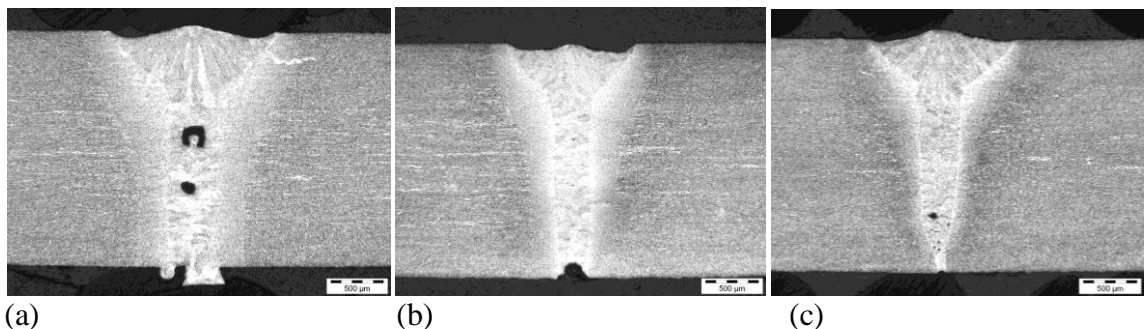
Melt runs produced with the YLS-1000-SM Yb-fibre laser in 2mm thickness Ti-6Al-4V using a 500mm focusing lens, a 0mm focal plane position, and welding speeds of (a) 50mm/s, (b) 66.7mm/s, and (c) 83.3mm/s.
